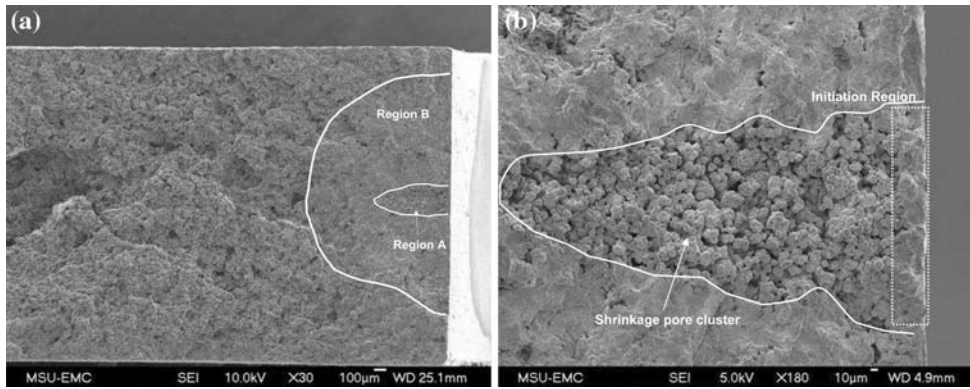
FEG-SEM fracture surfaces of sample M_1 ($N_f = 4520$) showing (a) an overall view of the fracture surface delineating the fatigue crack propagation and (b) a higher magnification of Region A, which corresponds to the crack propagation in a shrinkage pore cluster.
